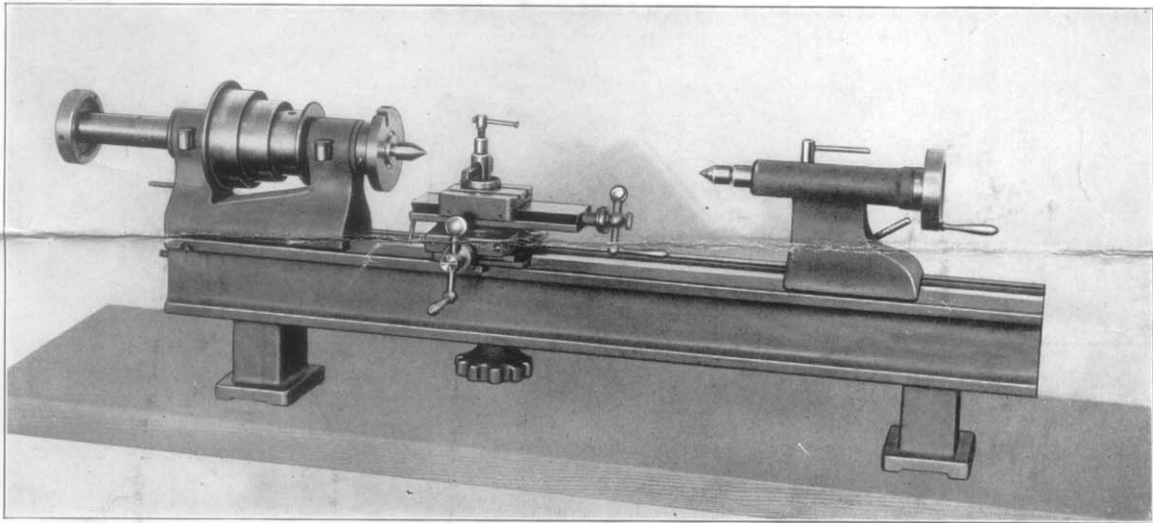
Series 507 Bench Lathe with Plain Bearing Headstock, Screw Draw-in Spindle, Slide Rest and Plain Tailstock
